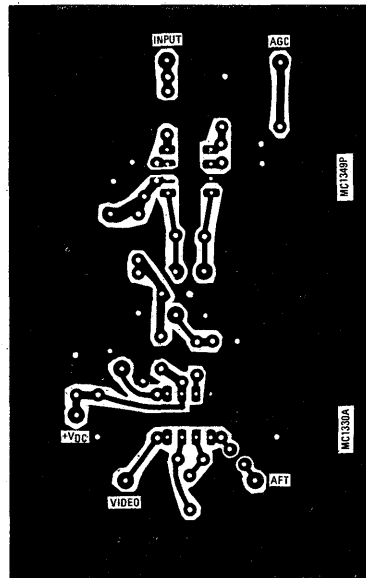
PRINTED CIRCUIT BOARD LAYOUT
